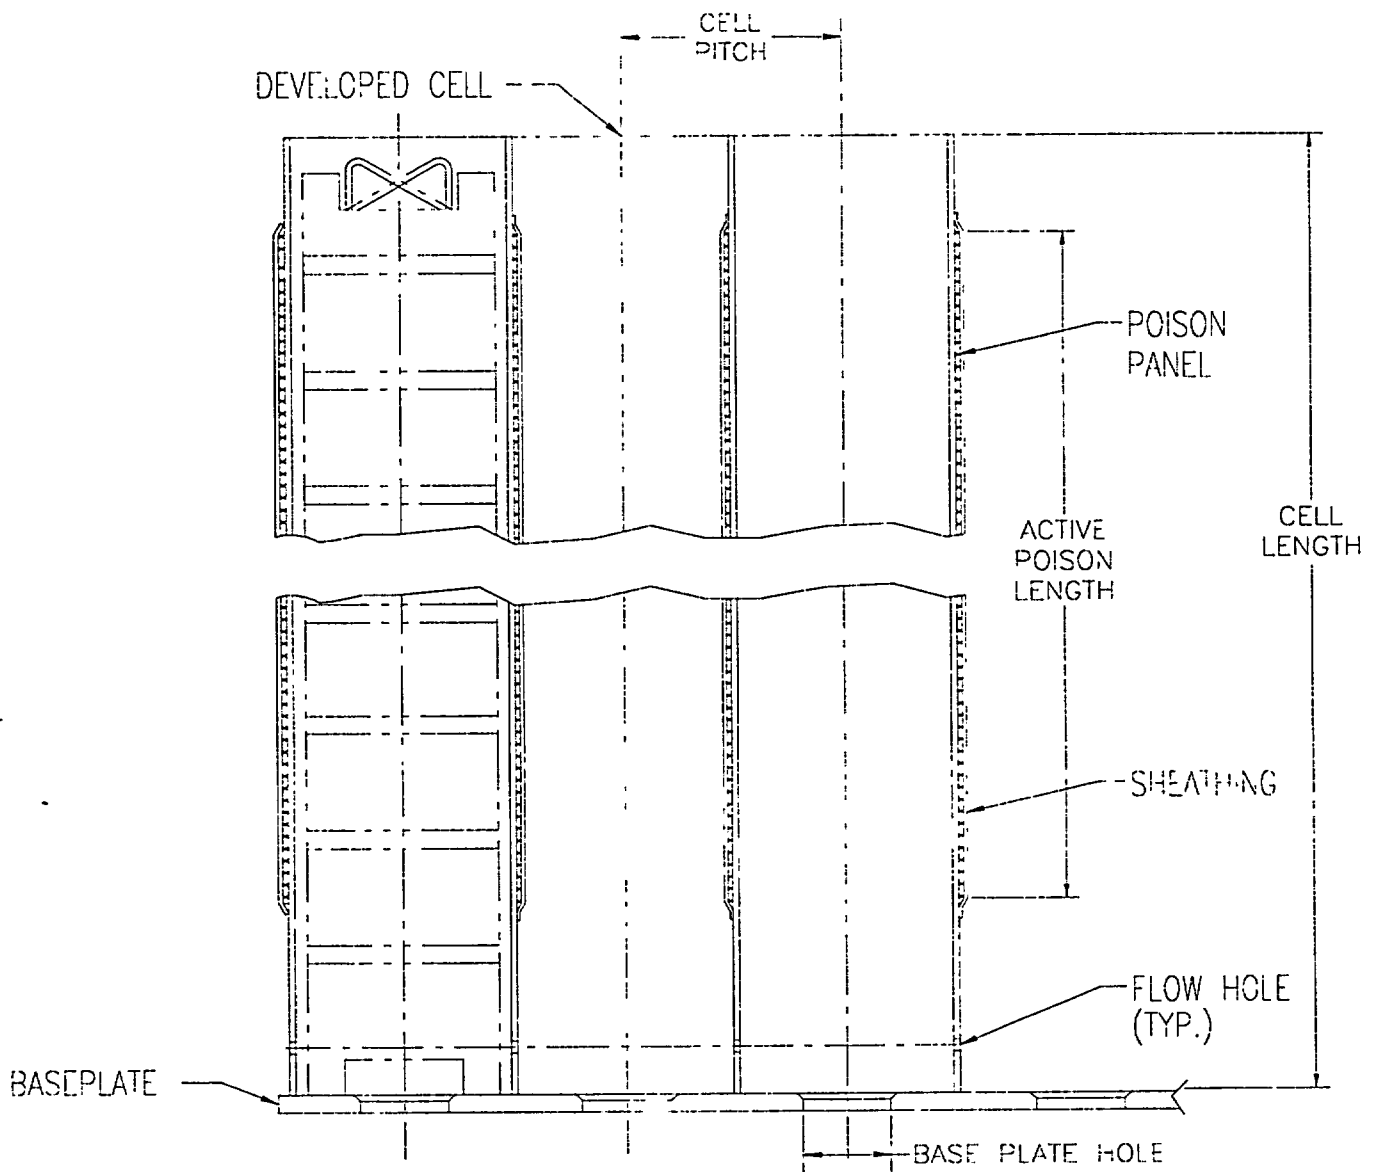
; ELEVATION VIEW OF STORAGE RACK MODULE
